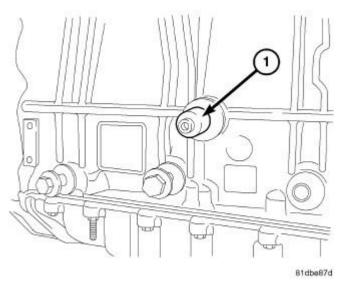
Crankshaft Locking Tool Courtesy of CHRYSLER LLC
